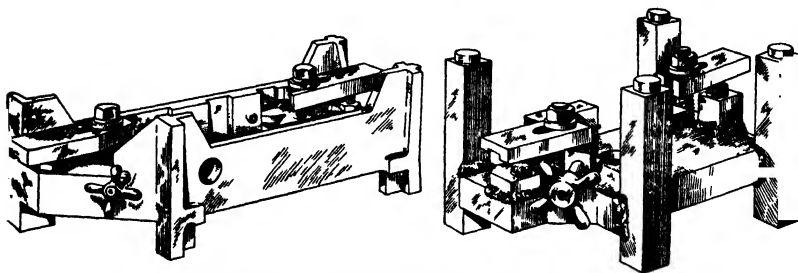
Difference in design between cast and welded fixture.
